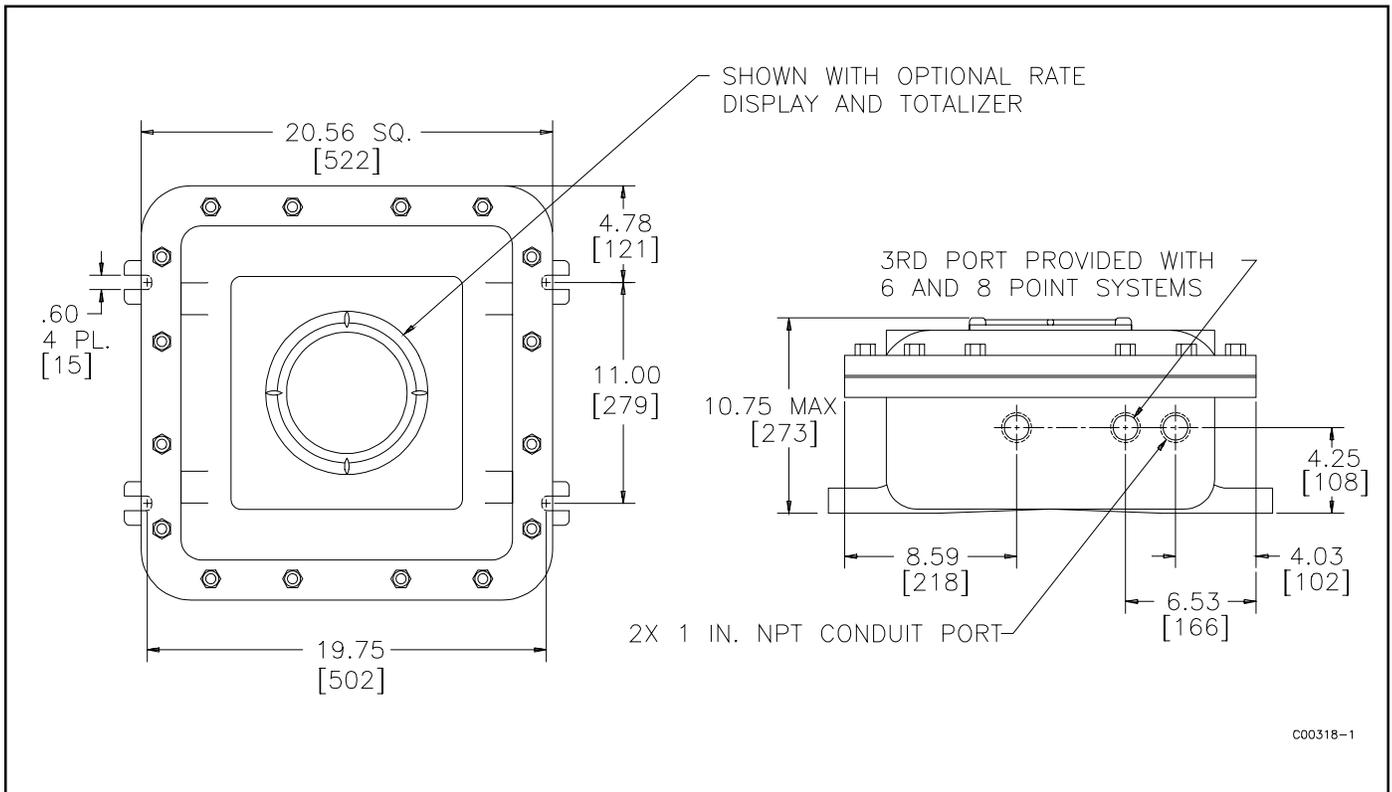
Remote Enclosure Dimensions (NEMA Type 7)
